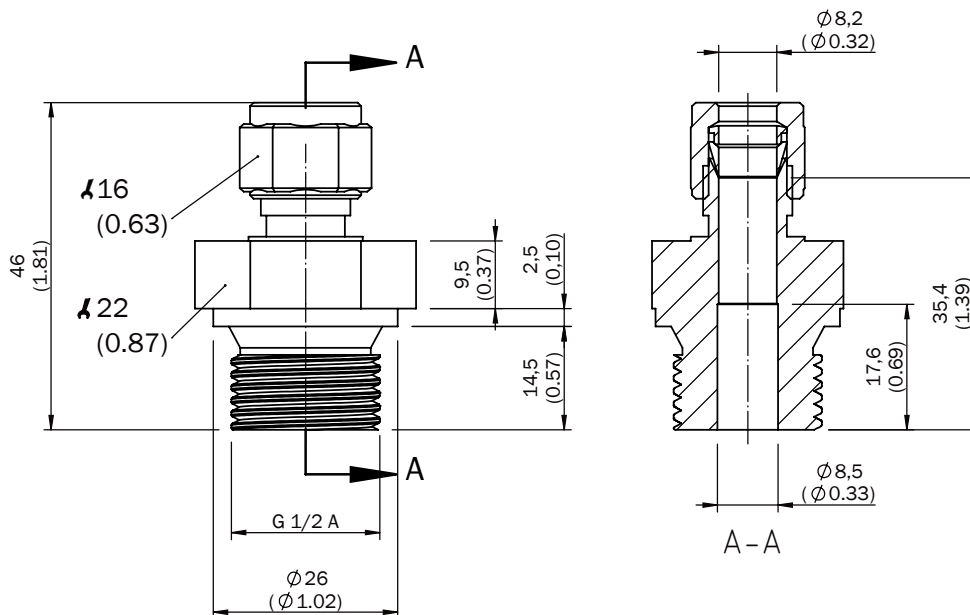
Dimensional drawing adapter G1/2 (p/n 5338774)
